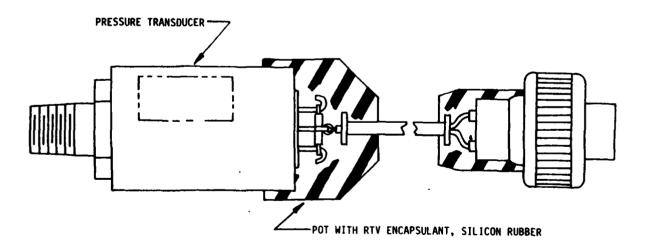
INTERNAL VIEW OF GOODYEAR PRESSURE TRANSDUCER ASSEMBLY
